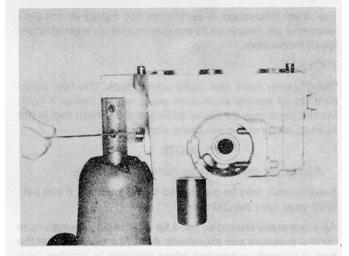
G-13. Removing Locking Pin from Bottom of Barrel
